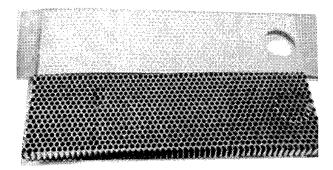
Failure surfaces resulting from peel testing of Untreated honeycomb and AF131-2 adhesive control specimen, indicating a mixture of cohesive failure and skin to adhesive failure.
